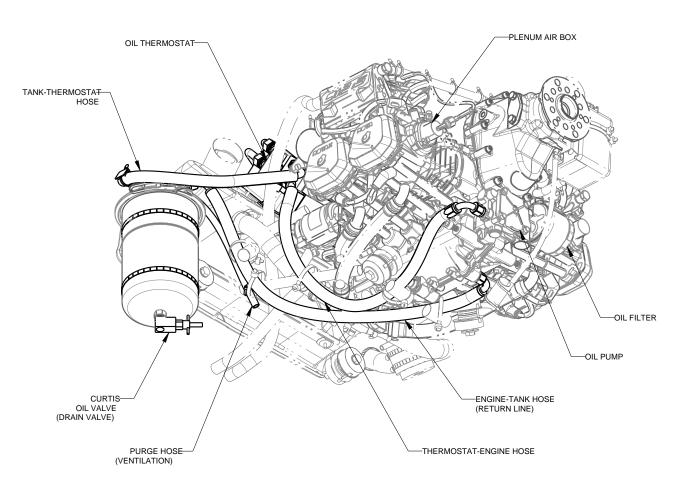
OIL SYSTEM COMPONENTS – BOTTOM, FWD, LHS VIEW
